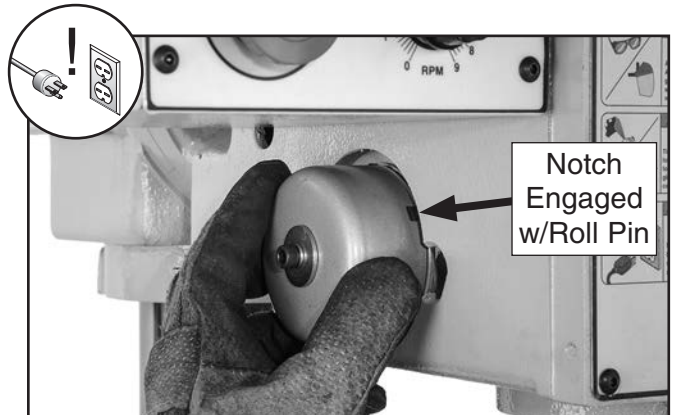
Adjusting spring tension by rotating spring cover to engage next notch with roll pin.
